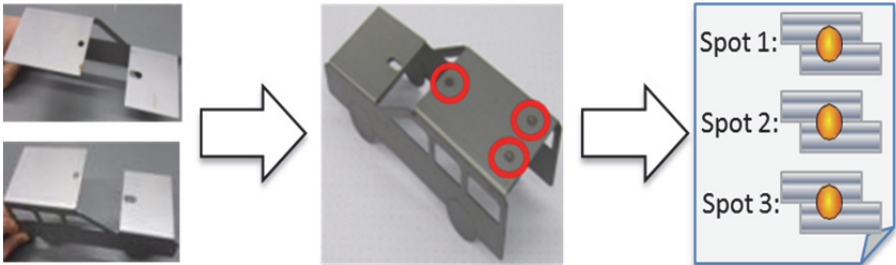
Example of a welding job with two metal sheets joined by three welding spots.
